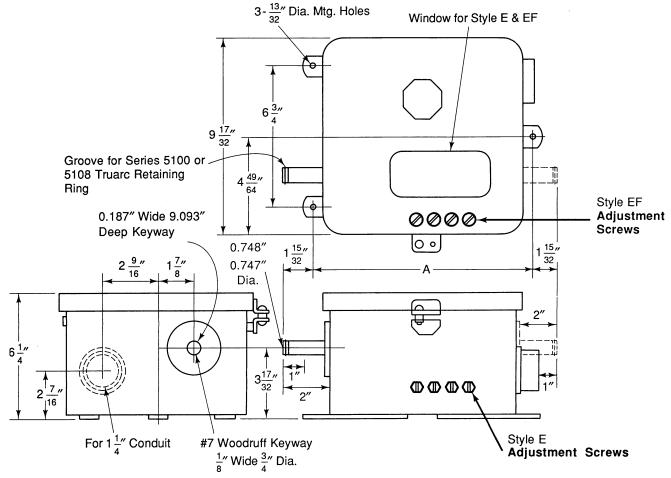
Rotating-cam limit switch adjustment screws. (Allen Bradley)
